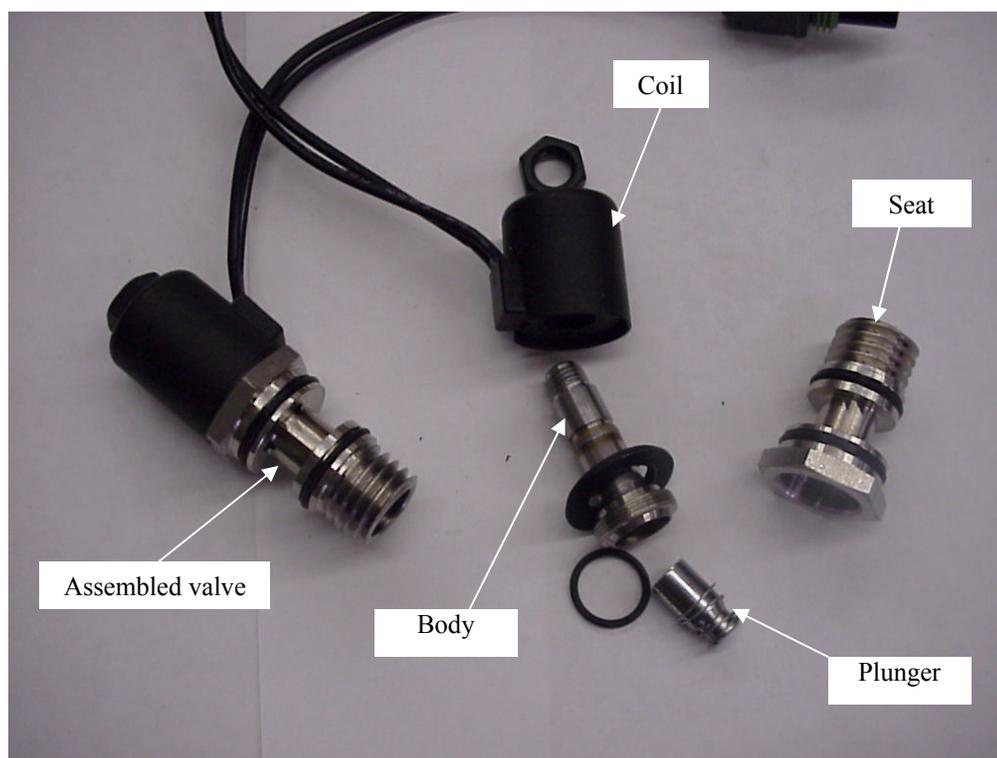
PWM Valve; nut, coil, body, o-ring, plunger and seat
